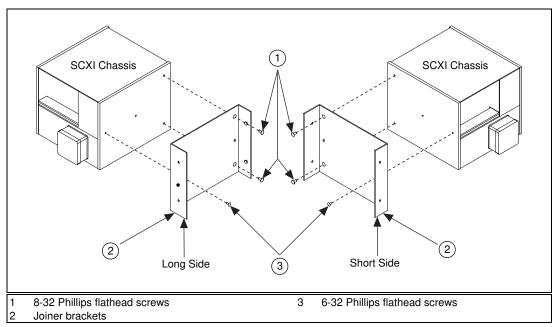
Attaching the Joiner Brackets to the SCXI Chassis
